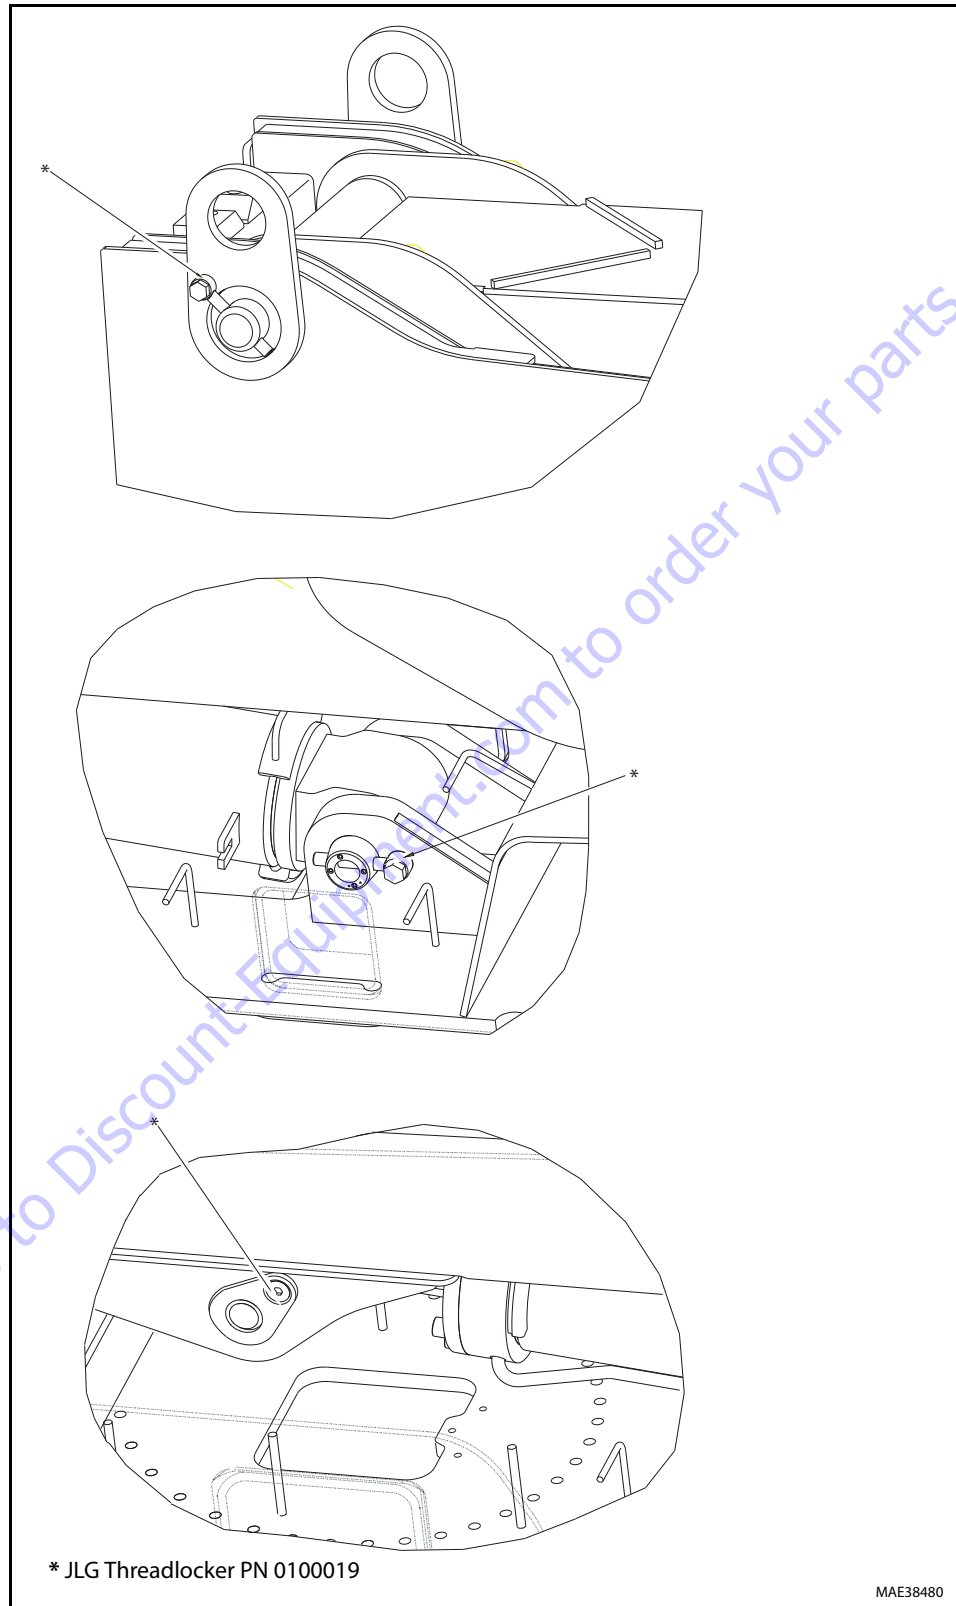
Locations for JLG Threadlocker Application - Sheet 4 of 5
